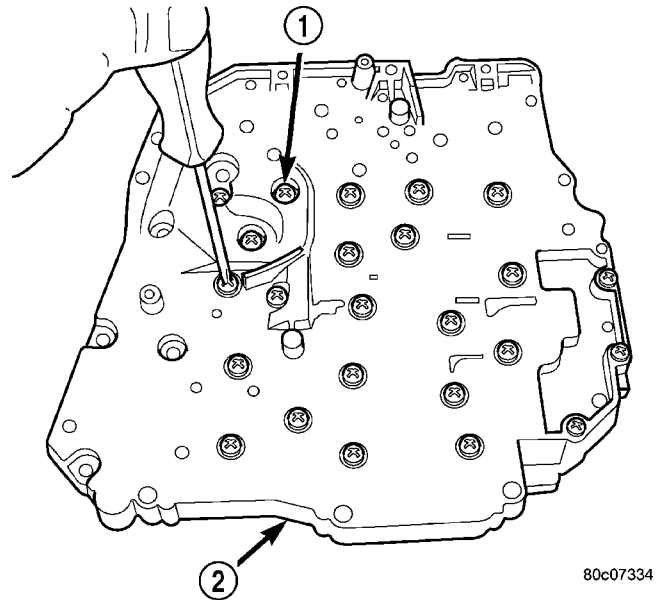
Remove Transfer Plate-to-Valve Body Screws
